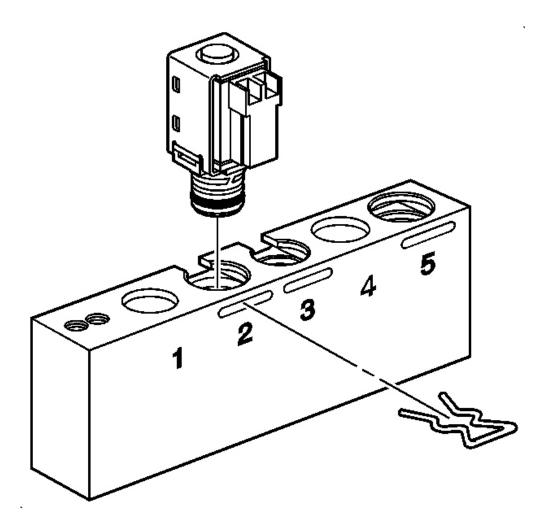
Identifying Valve & Bore No. 2 Of J 44246 Courtesy of GENERAL MOTORS CORP.
